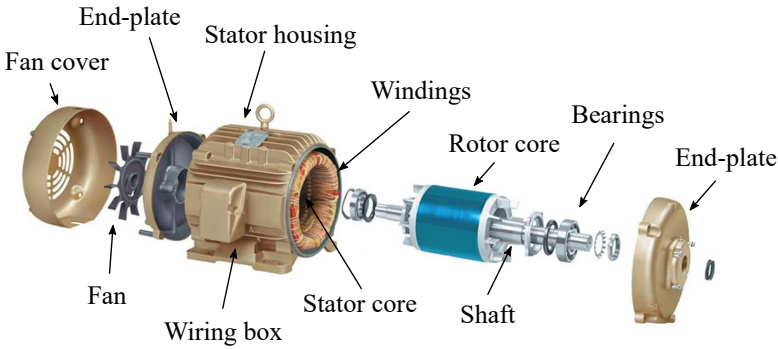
Example of an electric machine architecture - case of an IM exploded view [9]
